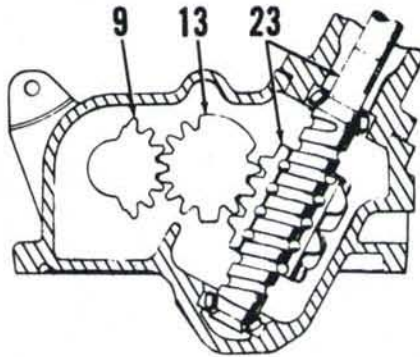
Cross-sectional view of early manual steering gear assembly showing correct installation of sector gears and wormshaft assembly. Refer to Fig. 3 for exploded view and parts identification.
